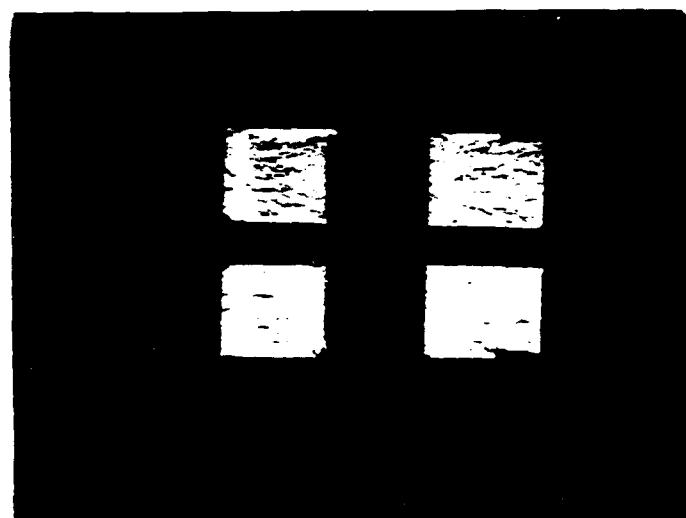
Fracture surfaces of 4340 steel; the dynamic specimen is on the left.
